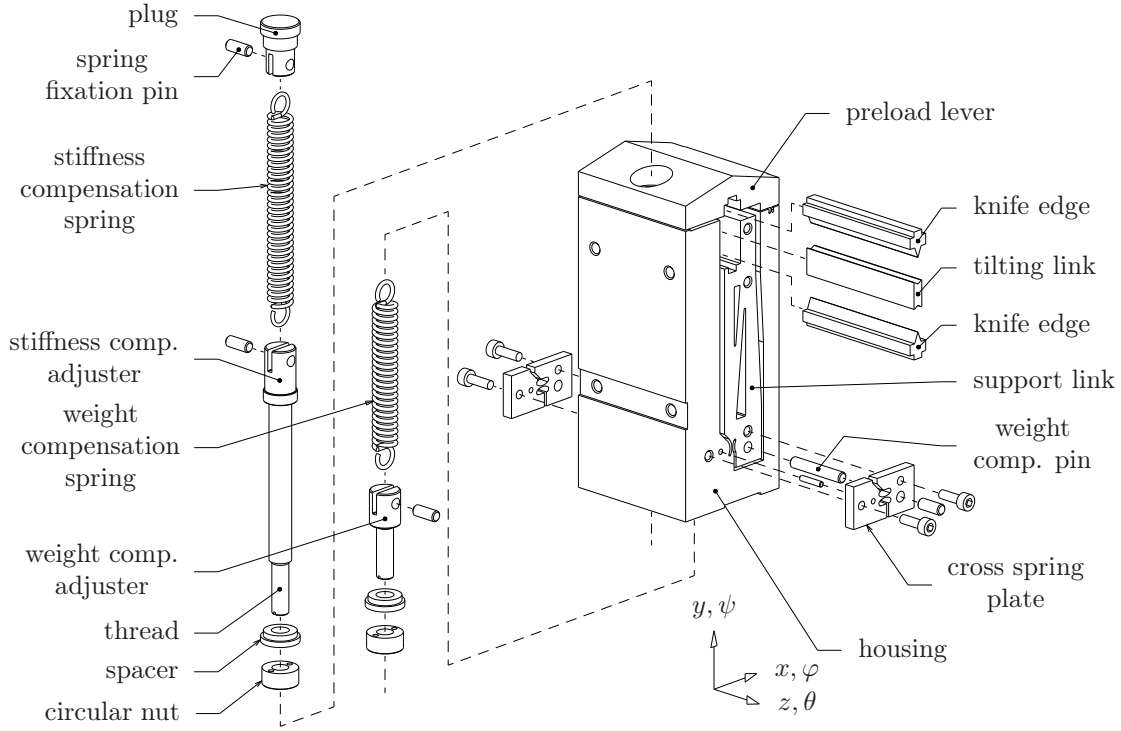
/ Exploded view of the compensation module. The housing measures $25 \times 26 \times 62$ mm.
